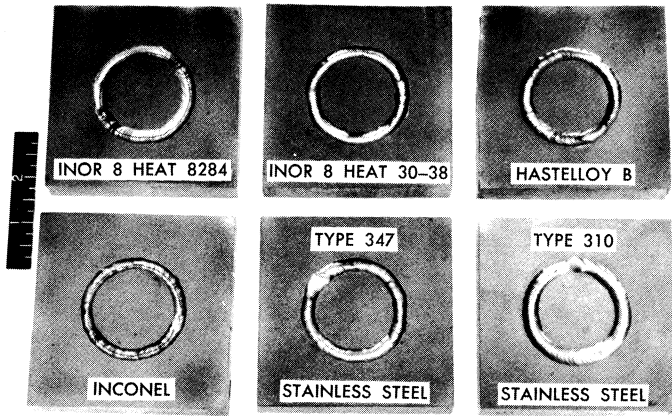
Circular-groove tests of weld metal cracking.
